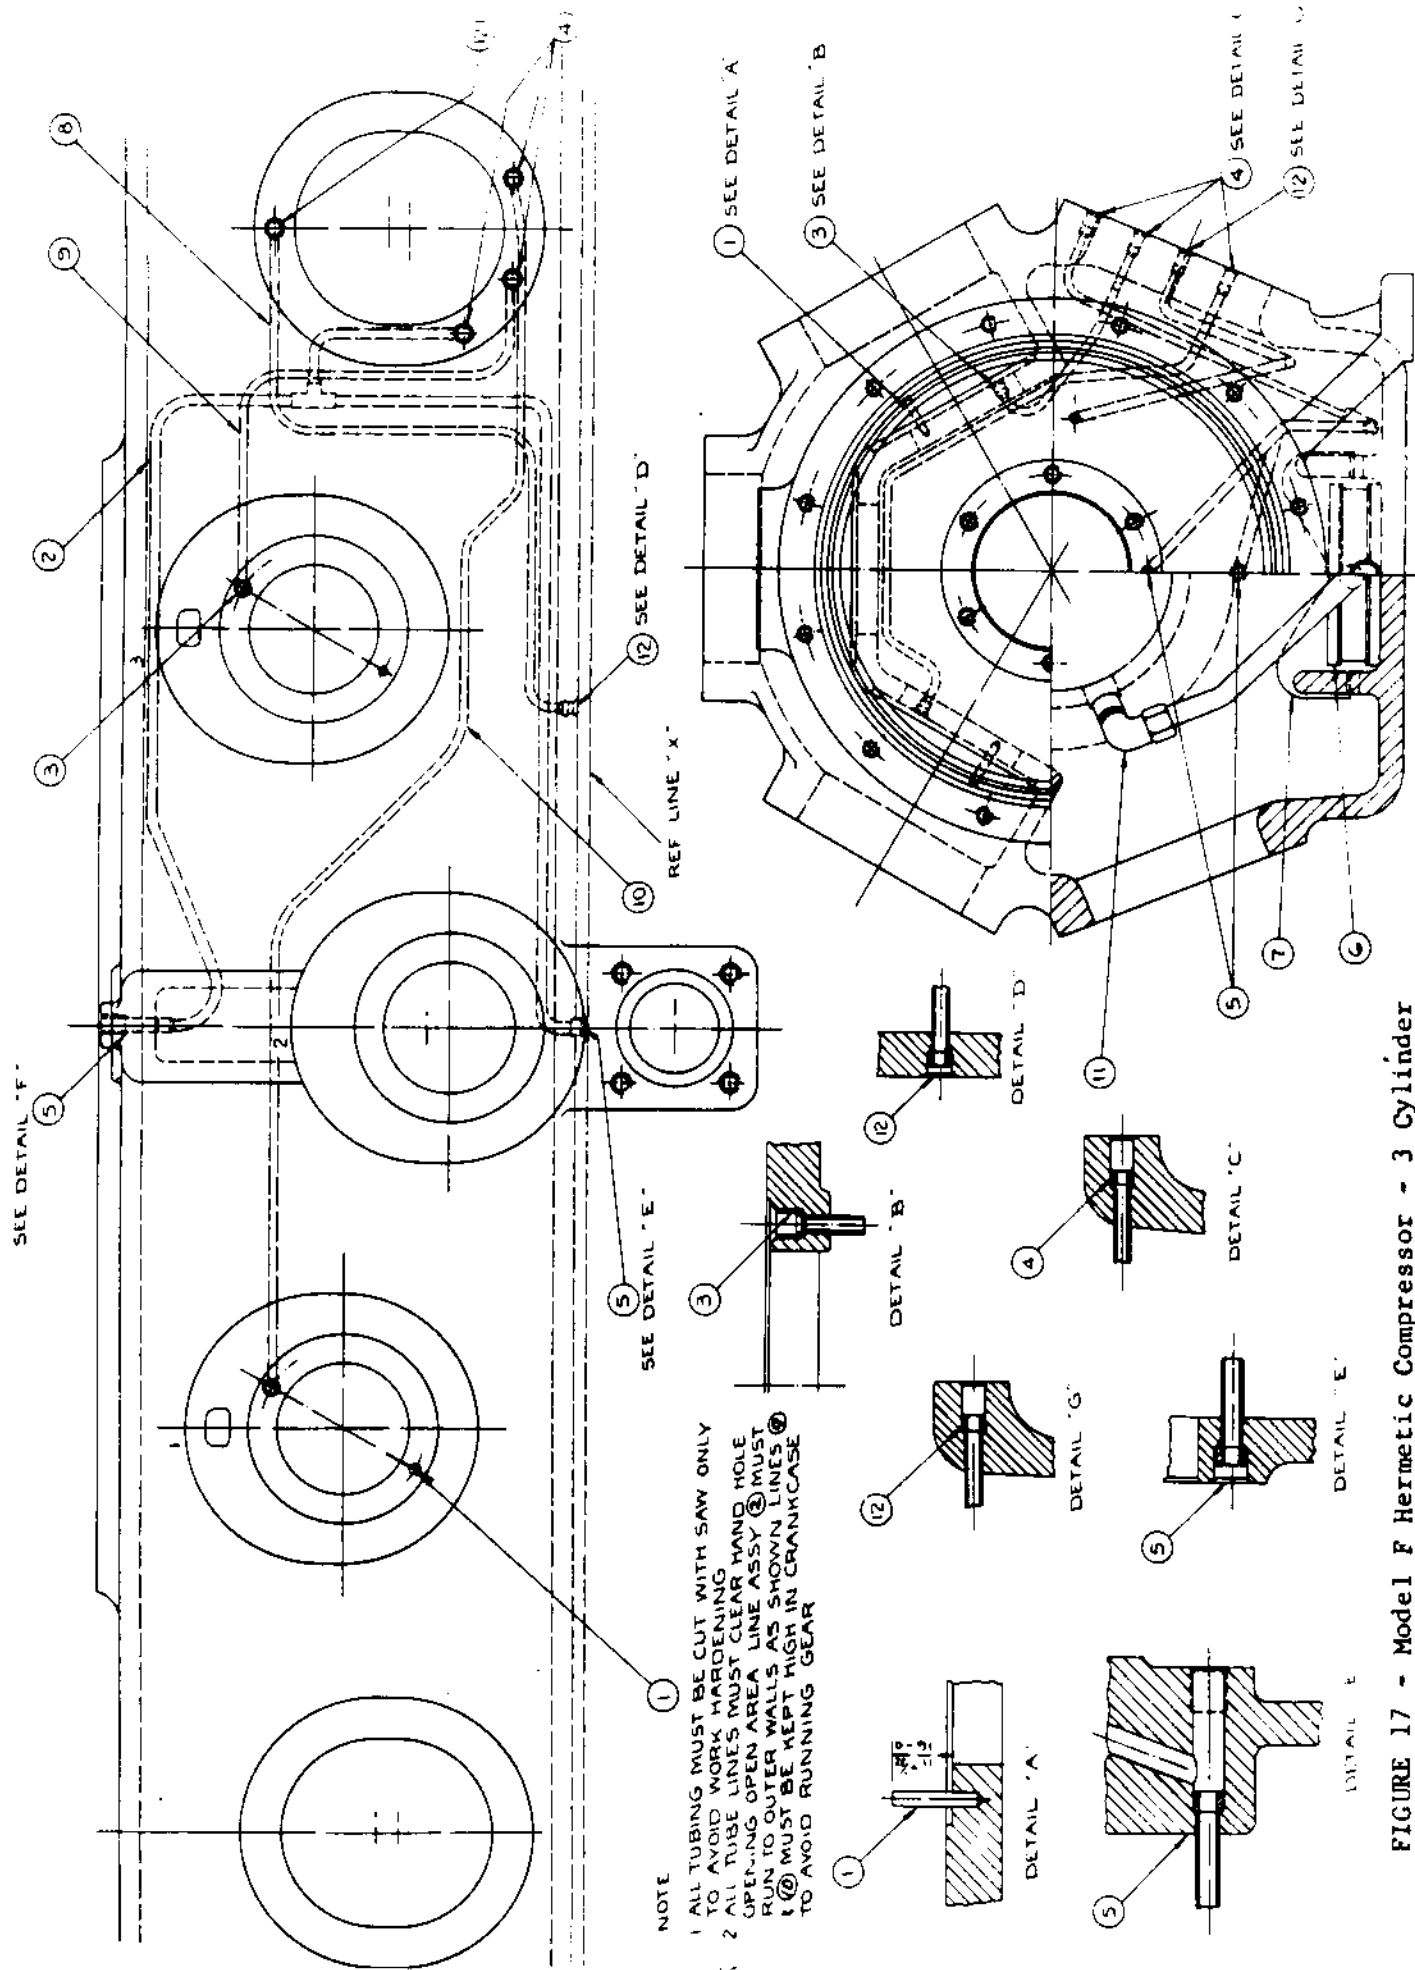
Model F Hermetic Compressor - 3 Cylinder
